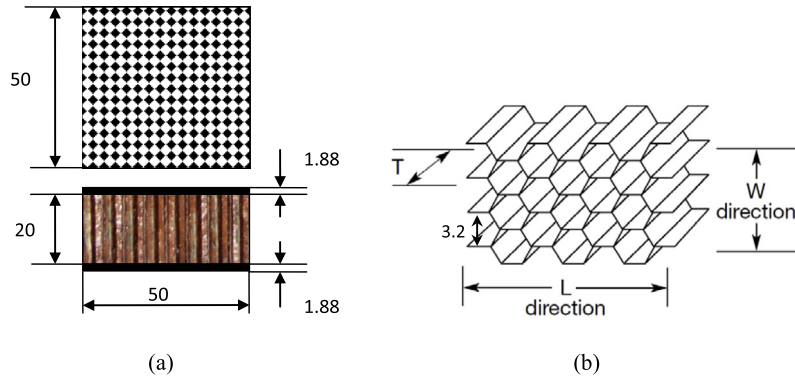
Geometry of the honeycomb sandwich specimen (dimensions in mm). (a) dimensions of the sandwich, (b) dimensions of the honeycomb core.
